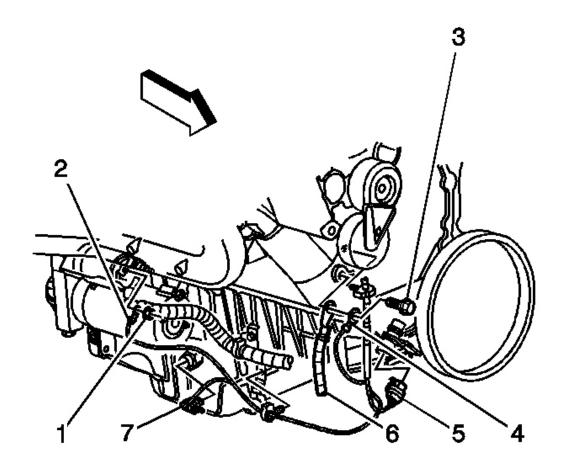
View Of Oil Level Sensor Electrical Connector, CKP Electrical Connector & Battery Ground Bolt Courtesy of GENERAL MOTORS CORP.
